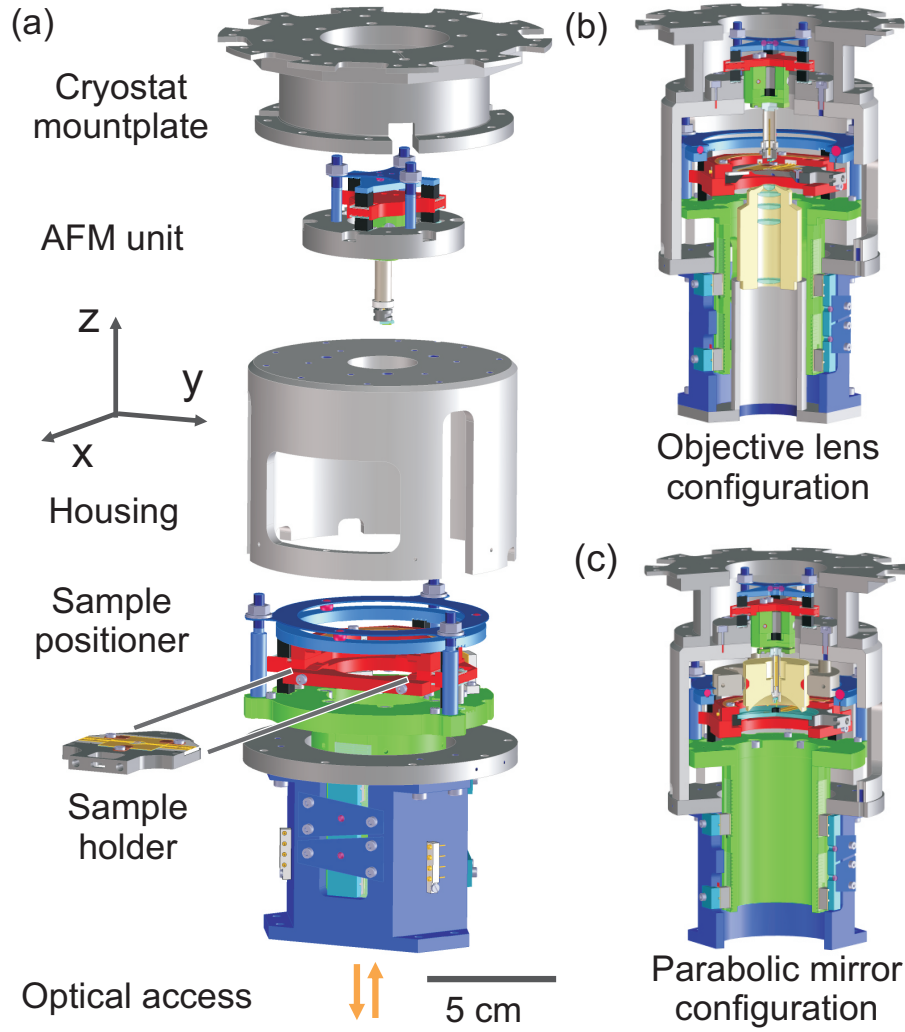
(a) Exploded view of the microscope head (b) Cross section with mounted objective lens (c) Cross section with mounted parabolic mirror; Components depicted in red are parts of the piezo positioners moving in the xy-plane, green parts are moving in z-direction.
